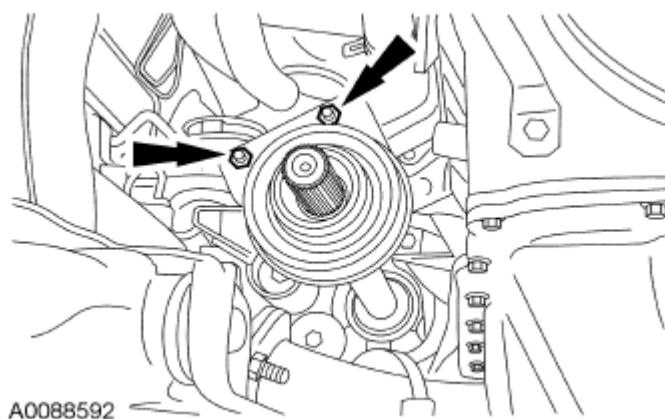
Locating Intermediate Shaft Bearing Retainer Nuts
